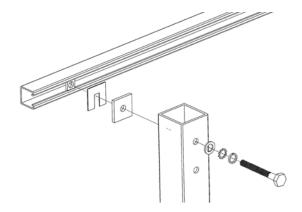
Typical side rail to frame assembly with spacer and shim placement shown, when applicable (Refer to Support Rail Assembly)
